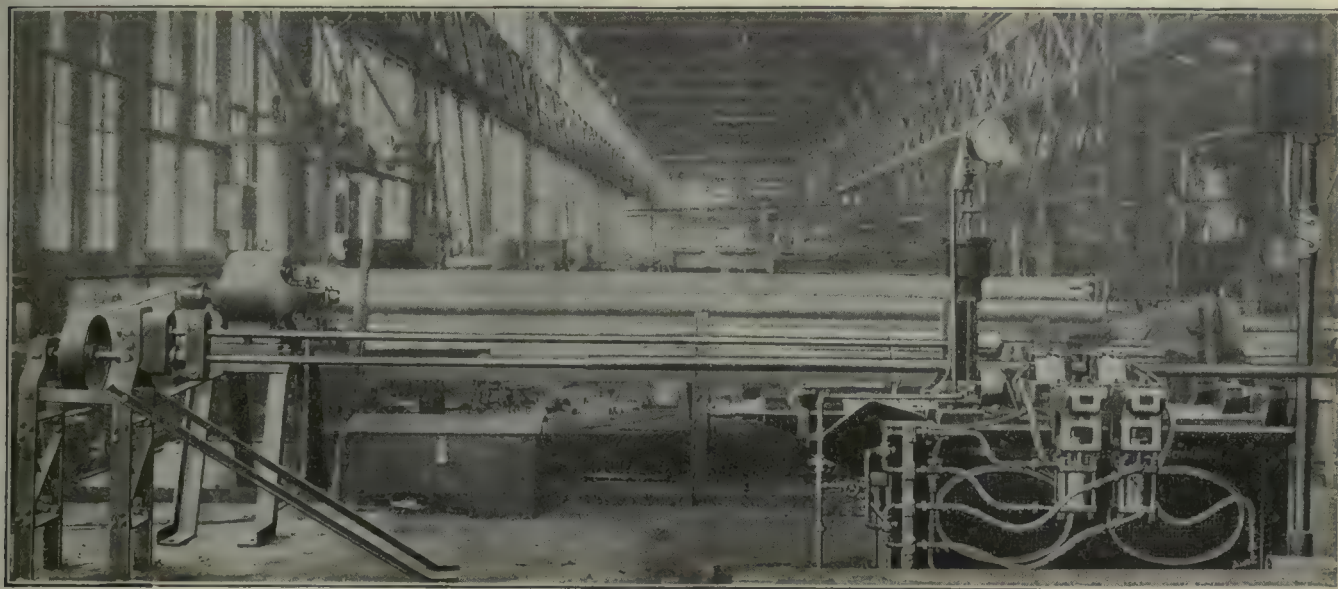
ELECTRIC WELDING MACHINE WITH BUILT-ON ROLLING DEVICE
